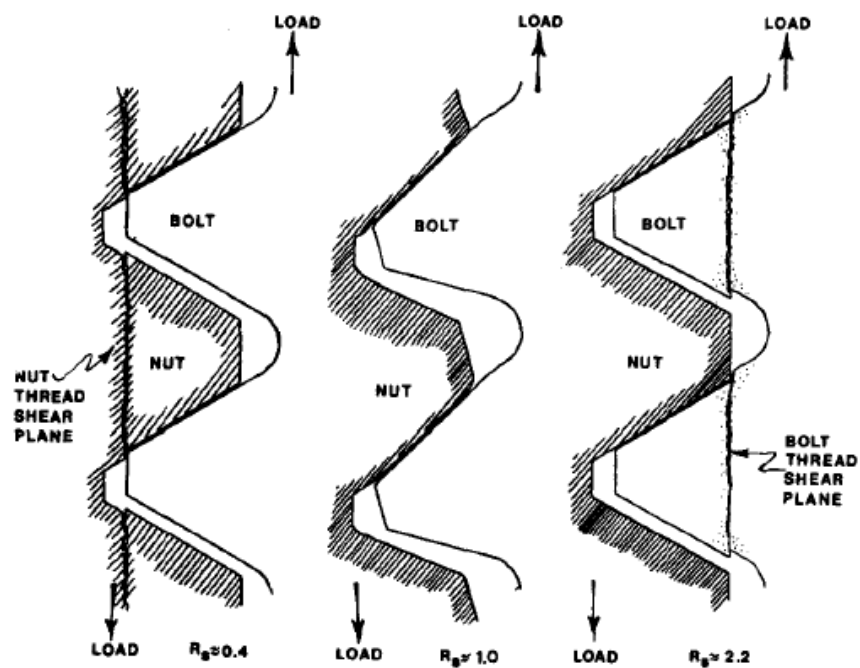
Illustration of shearing or stripping of the threads of the bolt and nut (Alexander, 1977)
